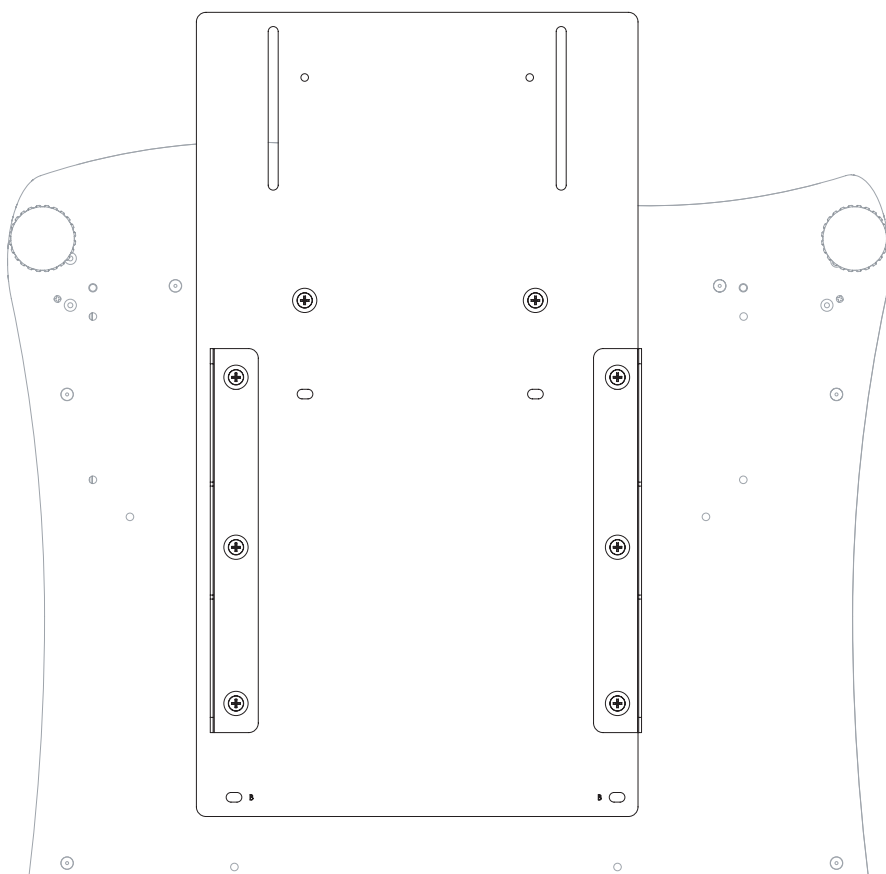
X-200i/CineWide with McKinley (Cylindrical) Lens Base Plate and Ceiling Mounting Rails - Bottom View
